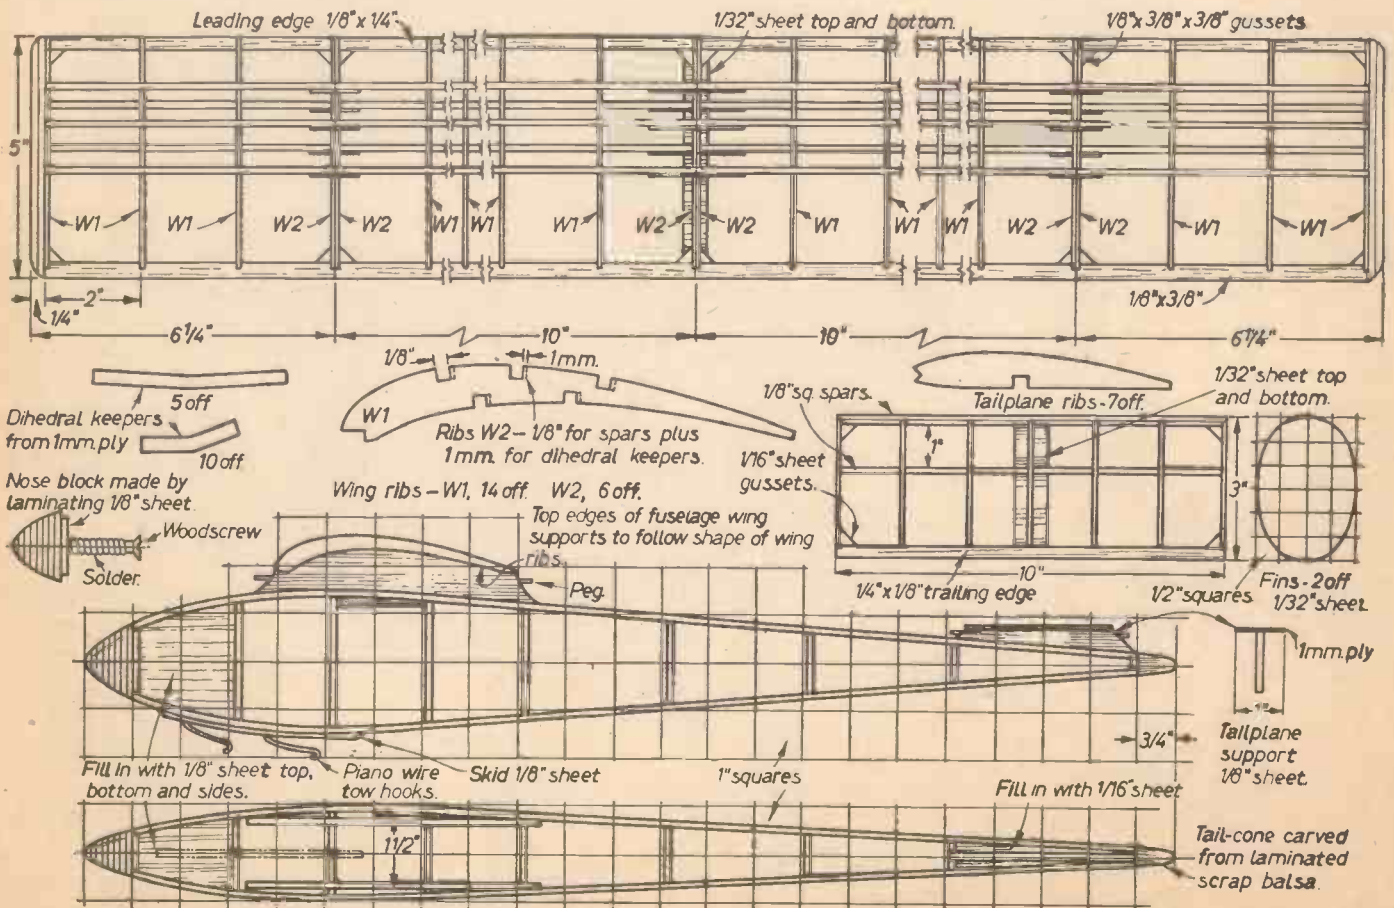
The plan. Details are given of fuselage, wings and tailplane.
